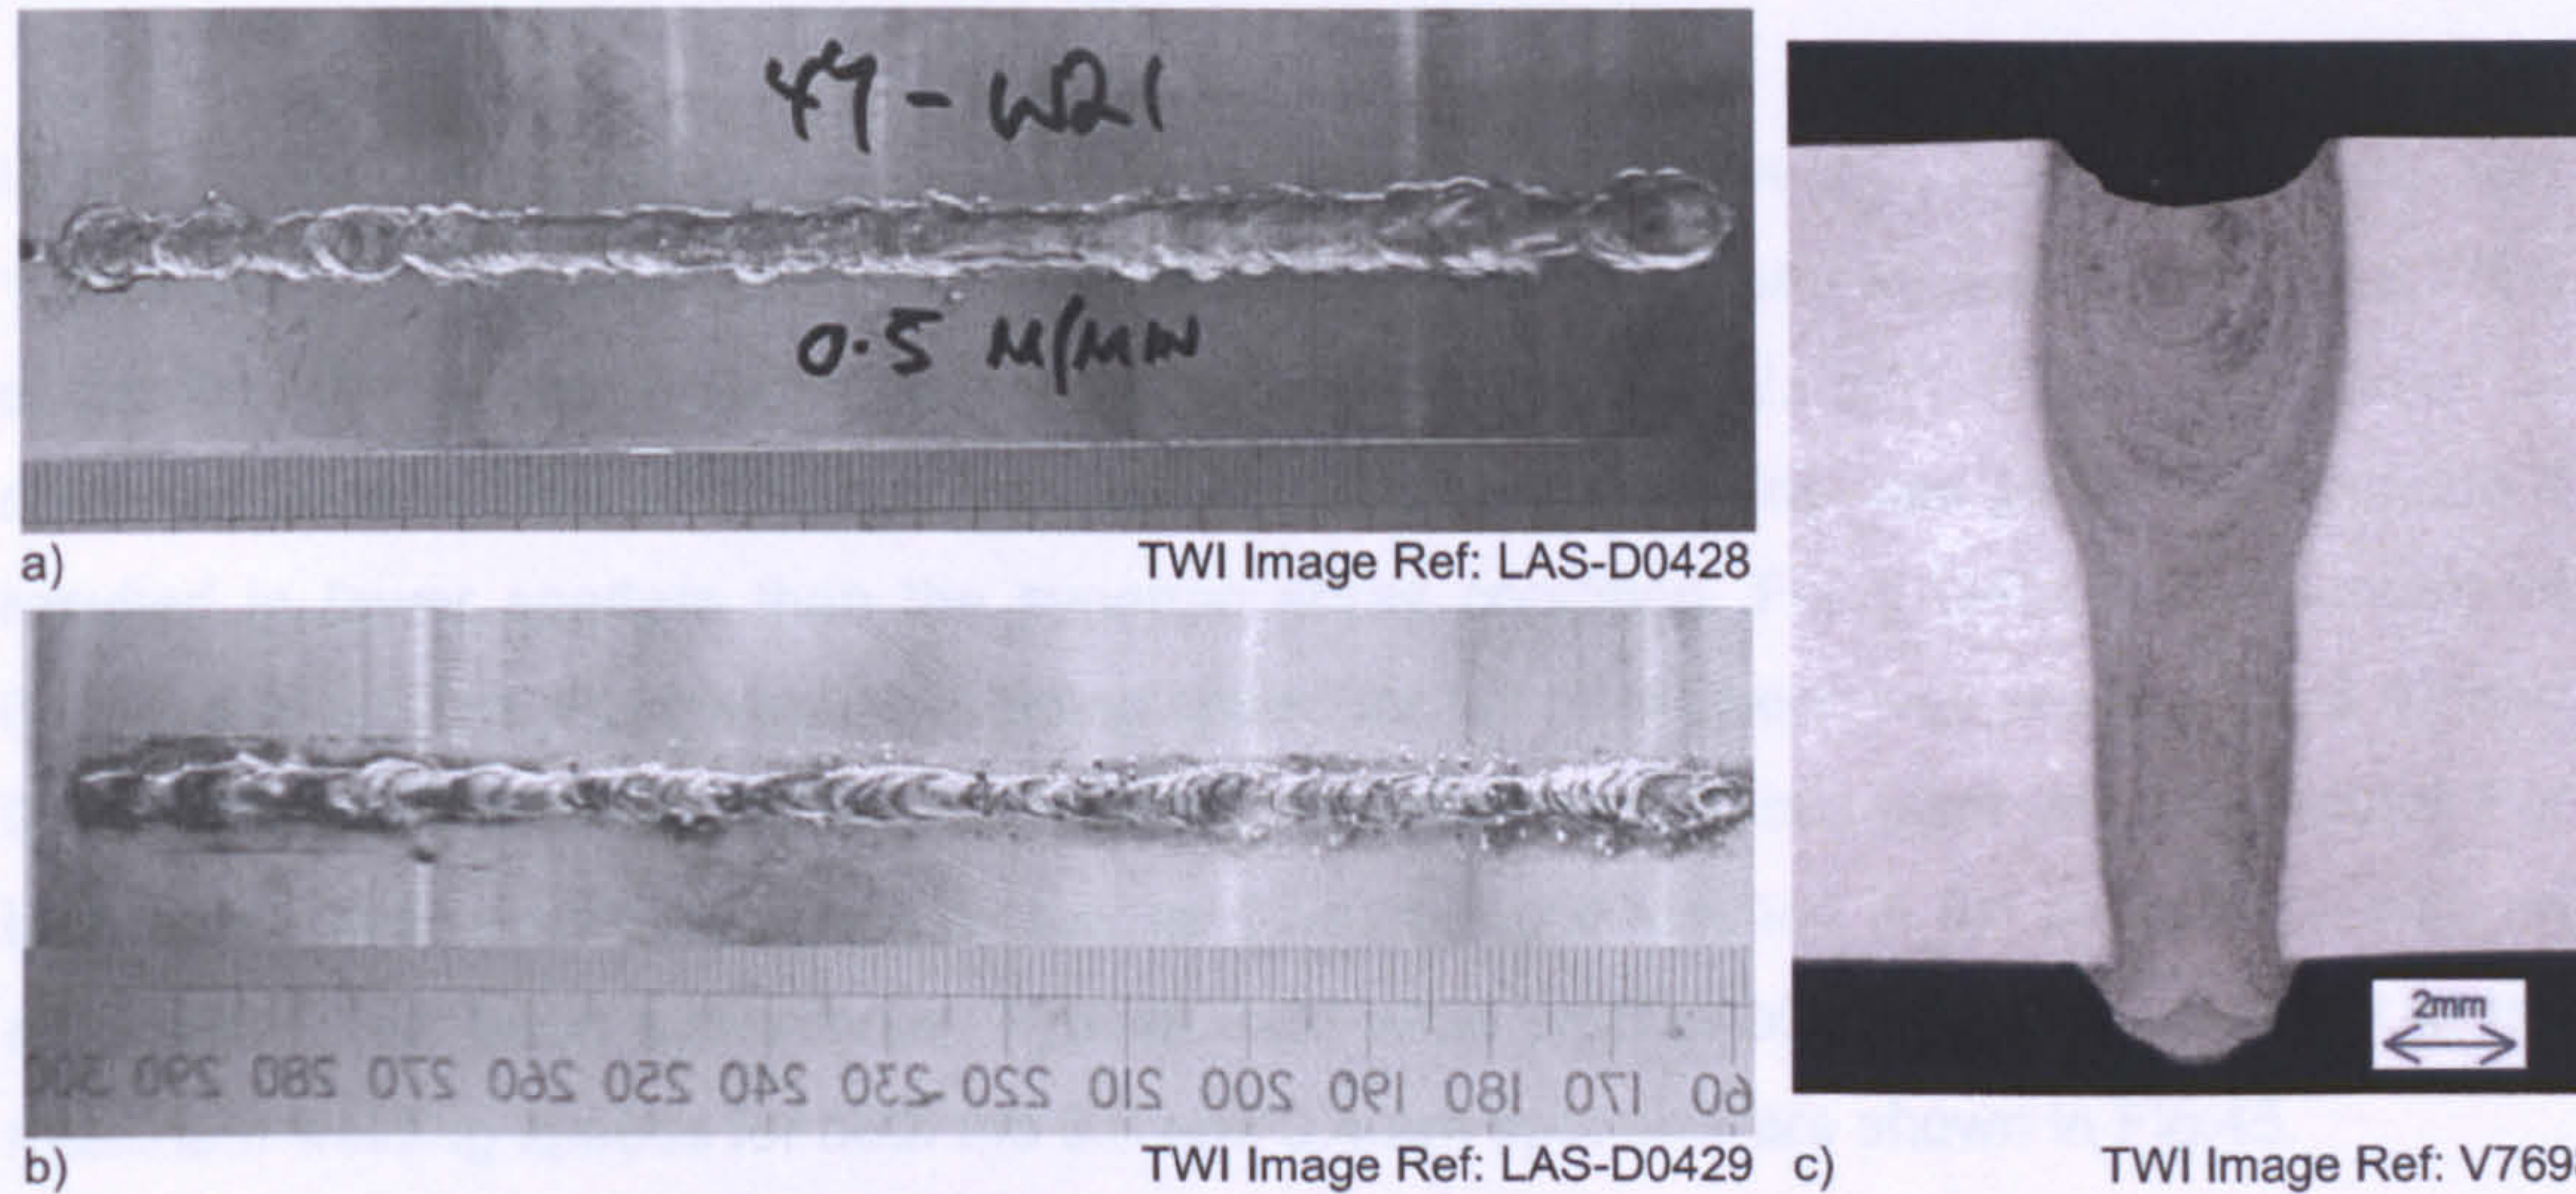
A fully penetrating melt run produced in the PF welding position in 12.7mm thickness 7xxx aluminium using 7kW of Yb-fibre laser power focused in a 0.6mm spot at a welding speed of 0.5/min:
